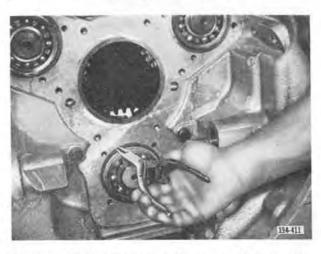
Removing Countershaft Front Bearing Positioning Snap Ring
